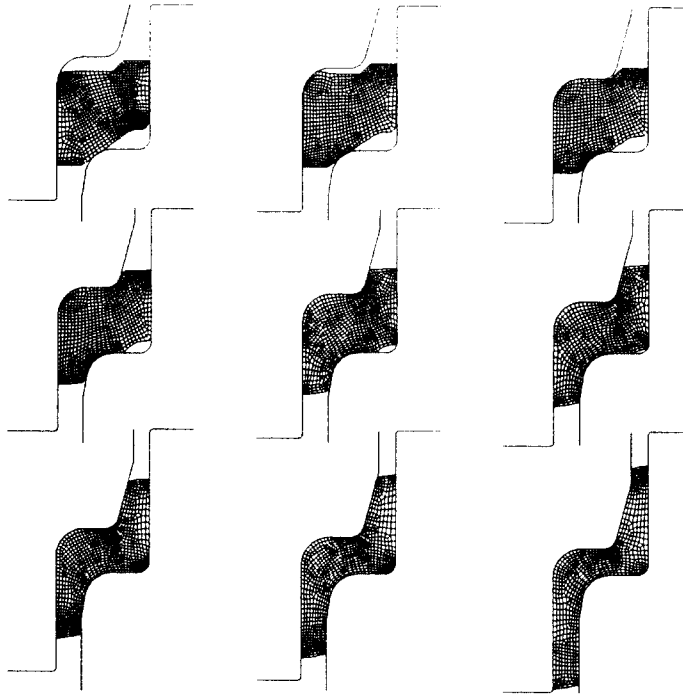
Formation of unfilling defect in a cold forging process.
